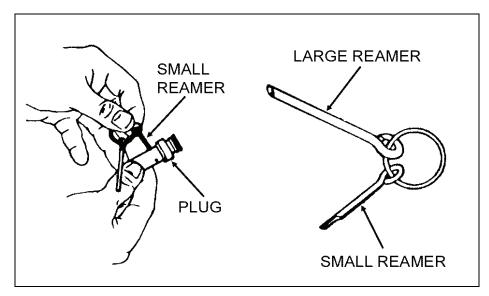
Tools for cleaning the gas regulator plug inlet holes.
